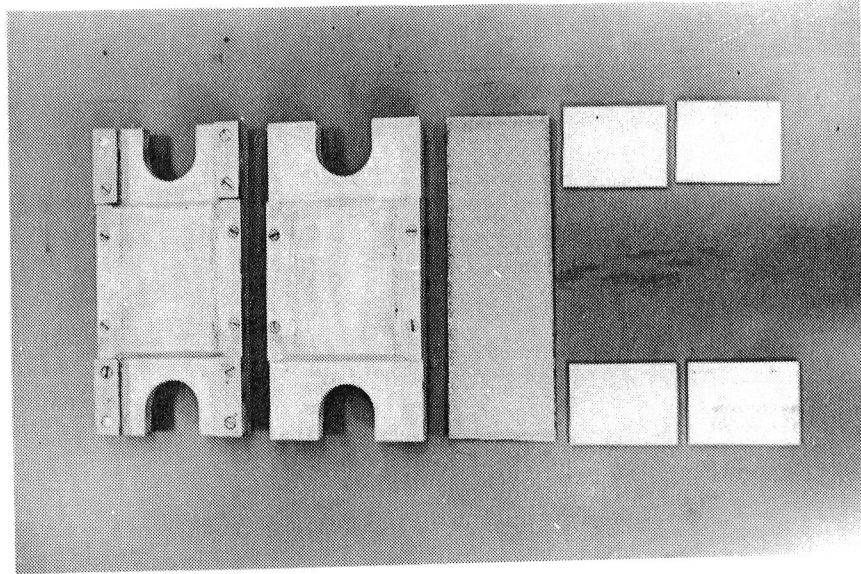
TENSION SAMPLE and END GRIP FIXTURE
